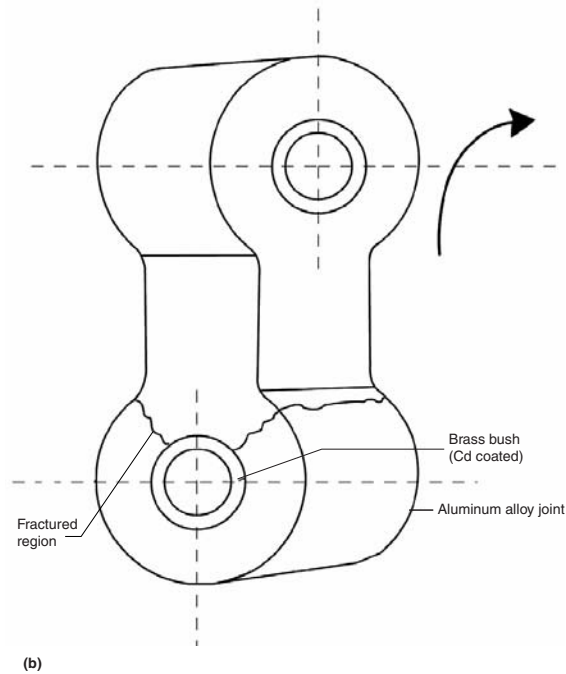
Starboard undercarriage door control mechanism, indicating the region of fracture of the link rod
